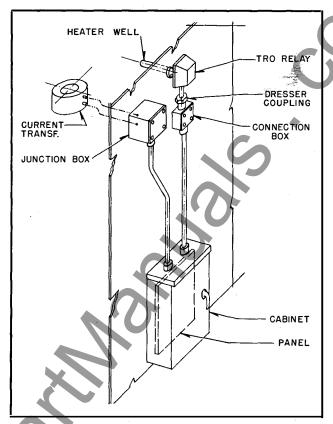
Sketch Showing Relay Mounted on Transformer Tank Wall.
